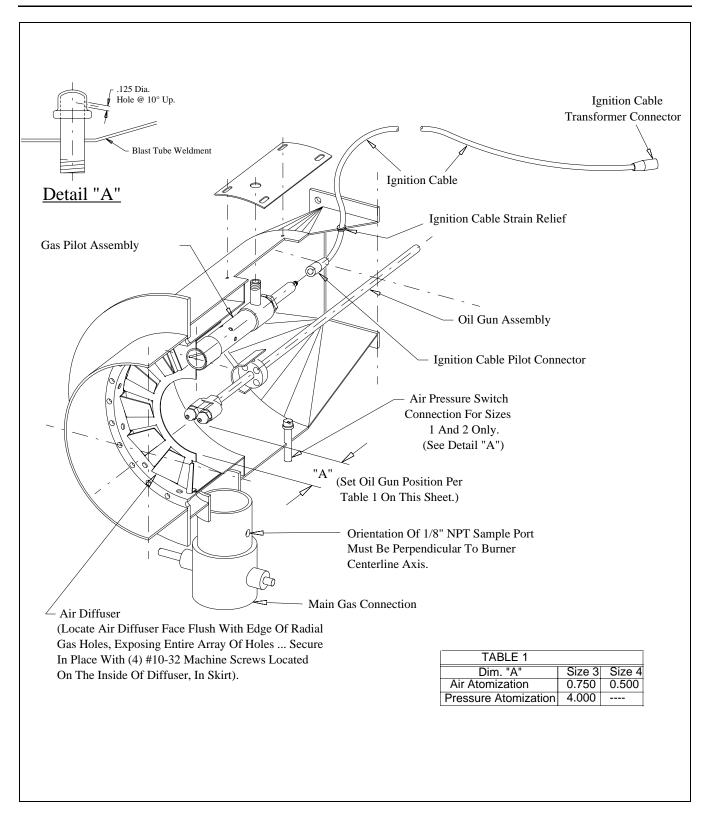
Blast Tube and Diffuser Start-Up Dimensions
